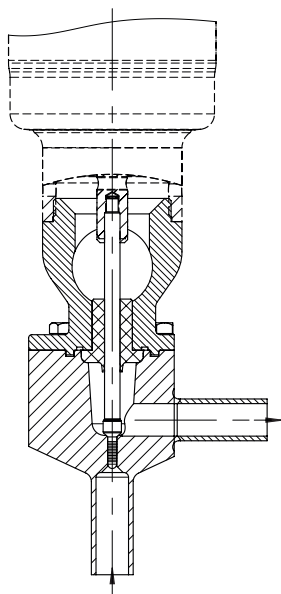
Type 3347/3379 Control Valve with welding ends
